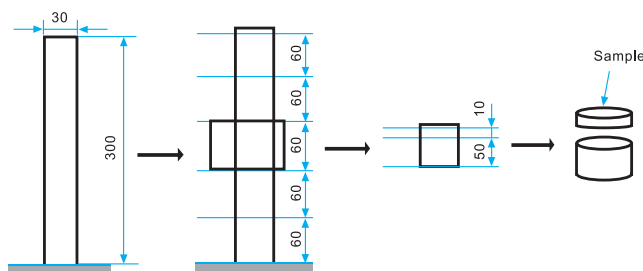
Preparation of sectioned surfaces of the cast part for examining (mm)
